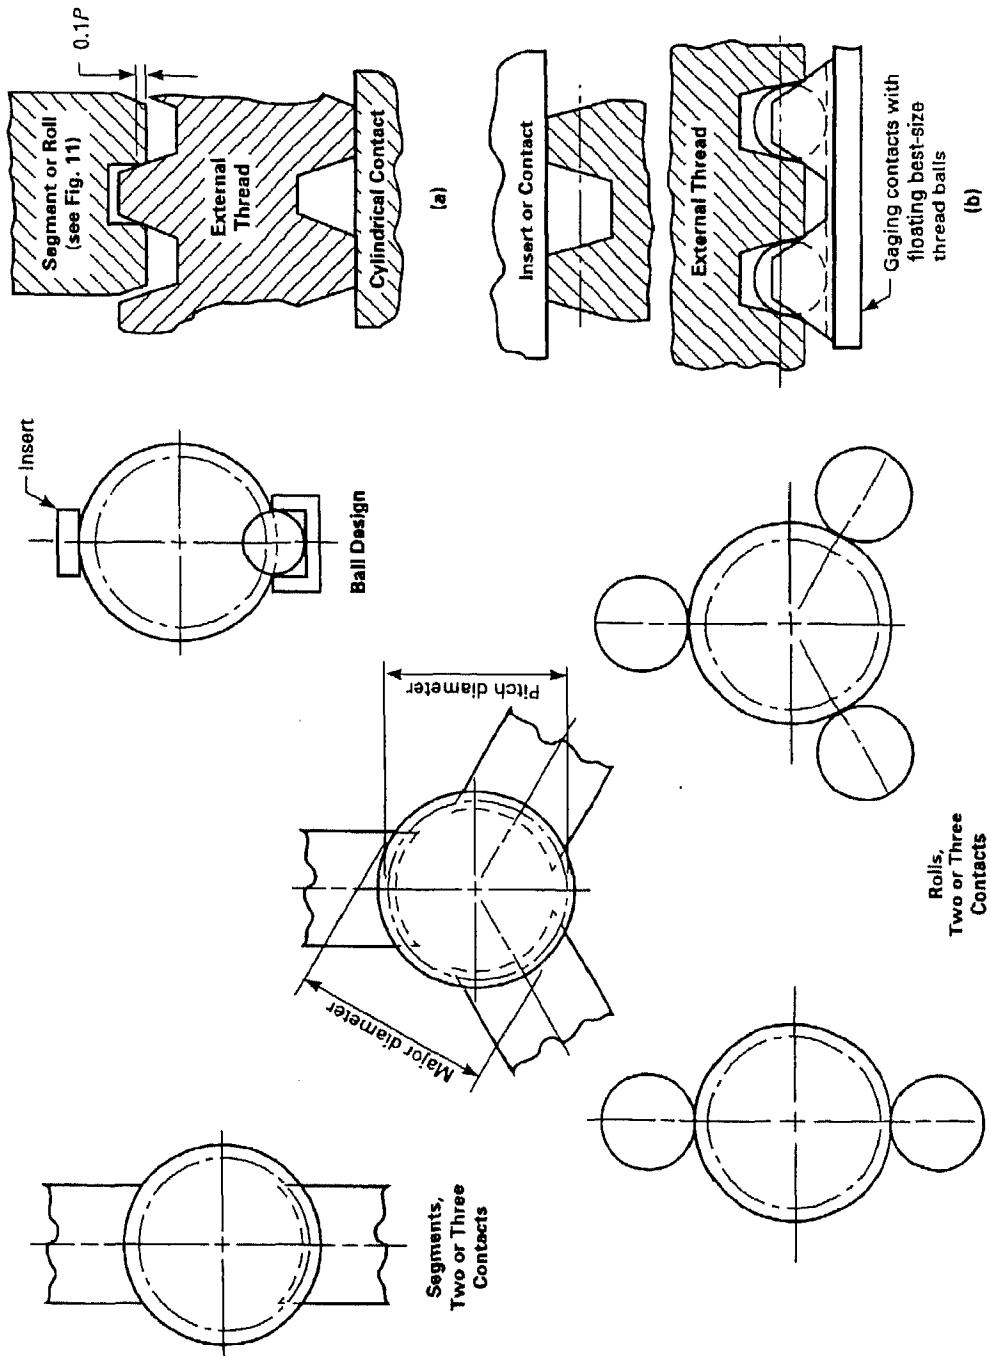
INDICATING THREAD GAGES — DIAMETER RUNOUT, MAJOR TO PITCH DIAMETER, FOR EXTERNAL THREAD
